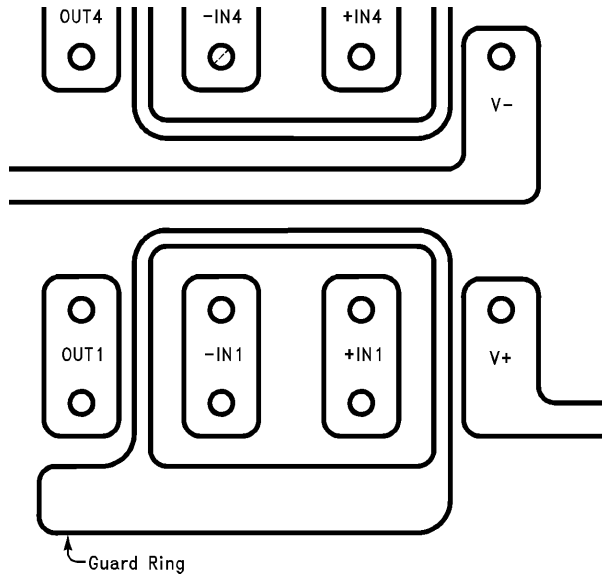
Example of Guard Ring in P.C. Board Layout, Using the LPC660
